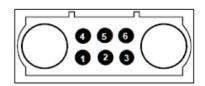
M80-5000642 Top view This is the PCB mounted connector on the driver
